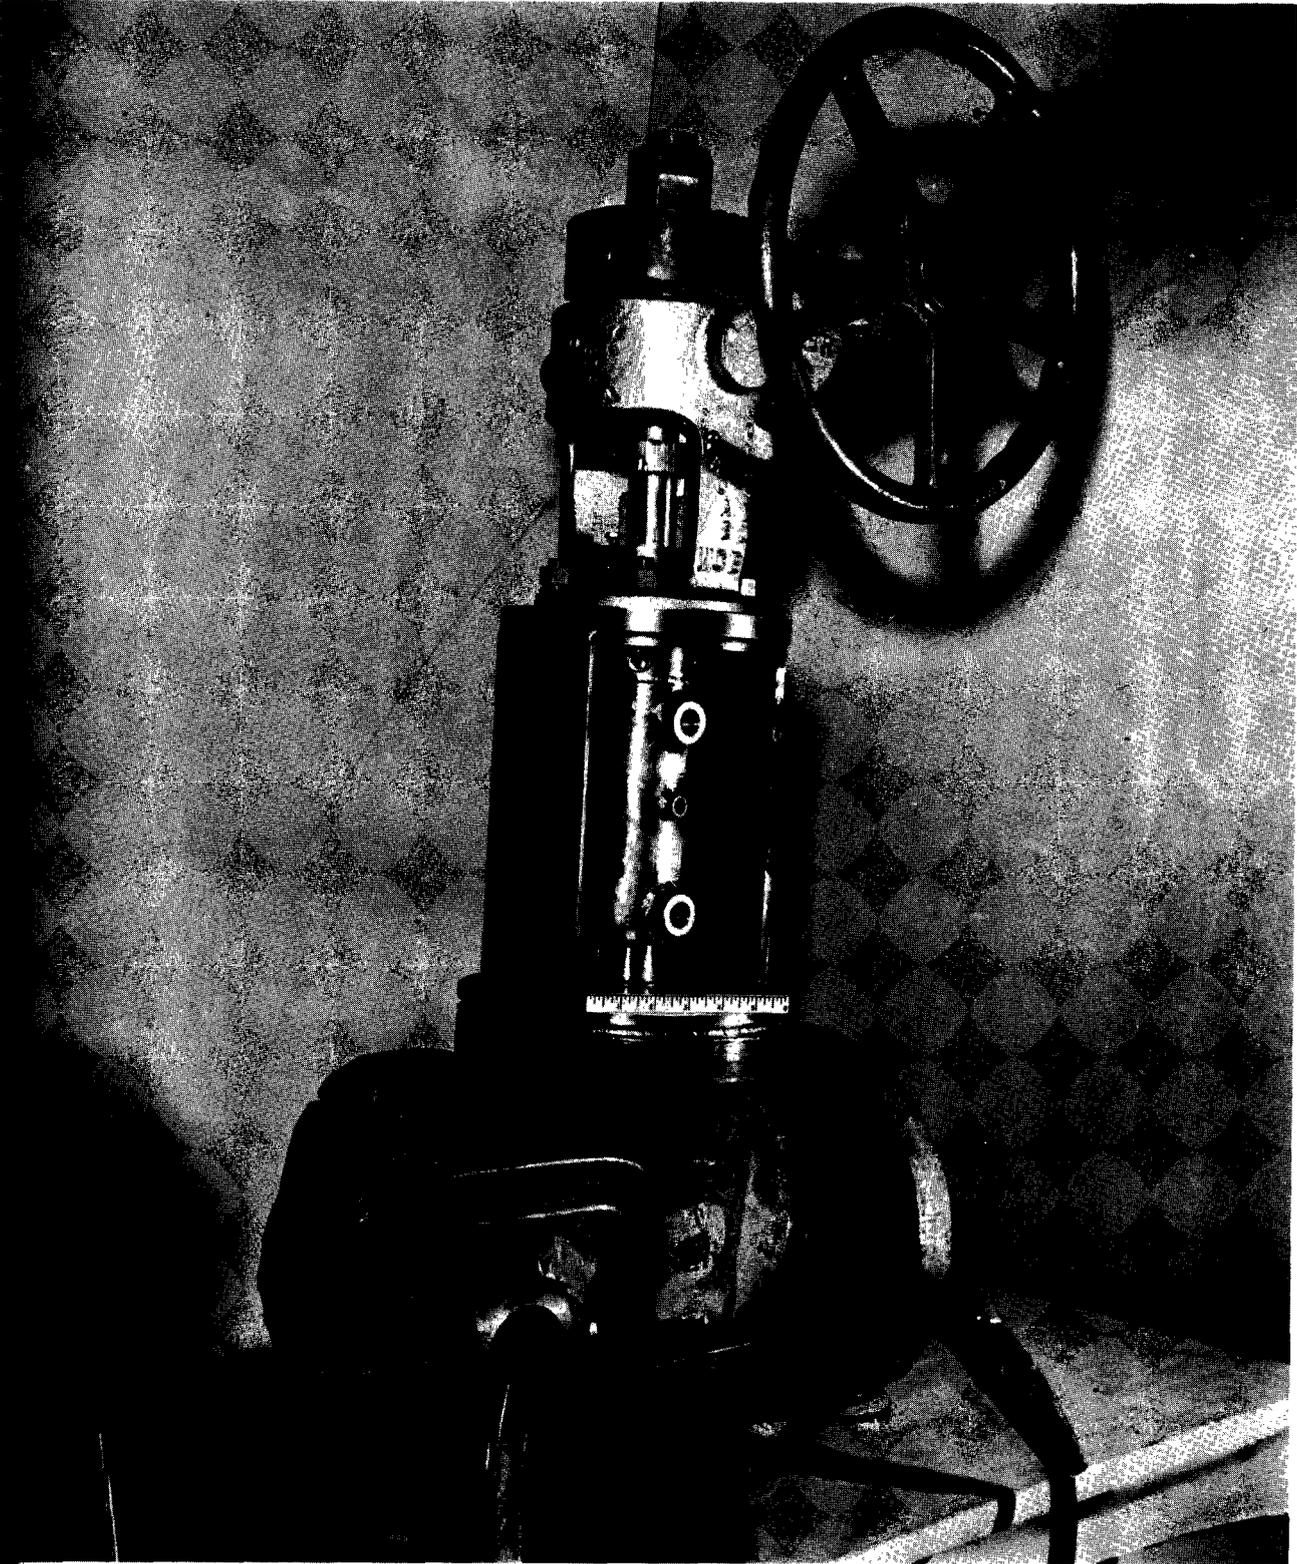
Six-Inch Plug Cock With Freeze Seal on Valve Stem
